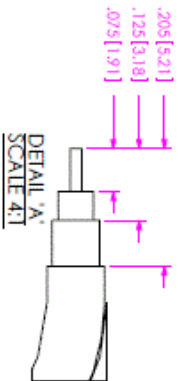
STRIP DIMENSIONS (SEE NOTE 10) FOR STRIP W
